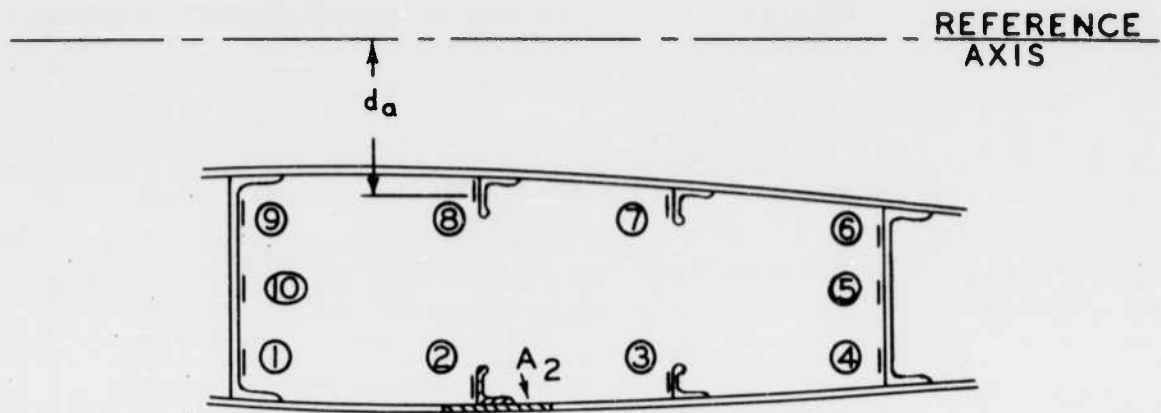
Typical Horizontal Stabilizer Strain Gage Installation
